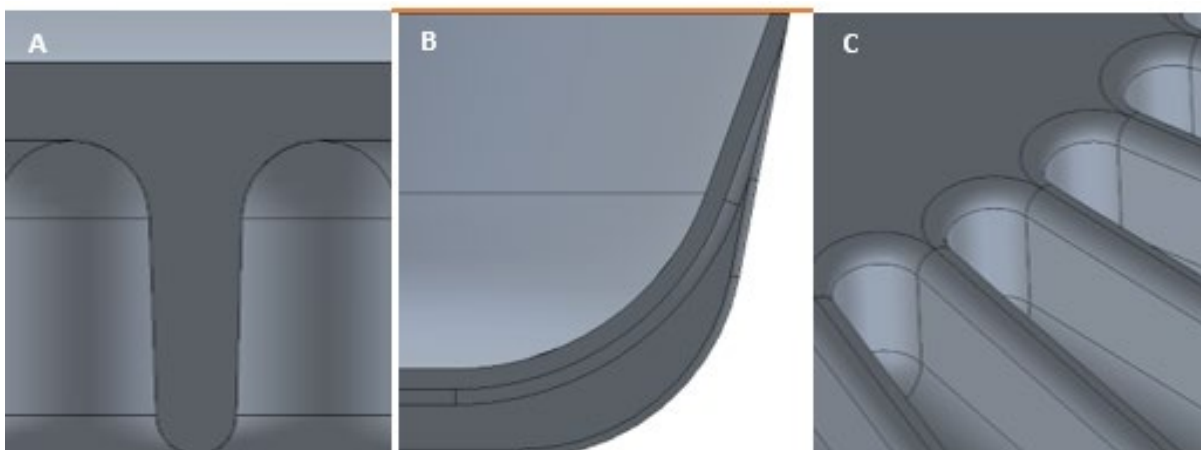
A) section view of fin, B) section view of the side of the pan, C) close-up of fins merging at the centre block.
